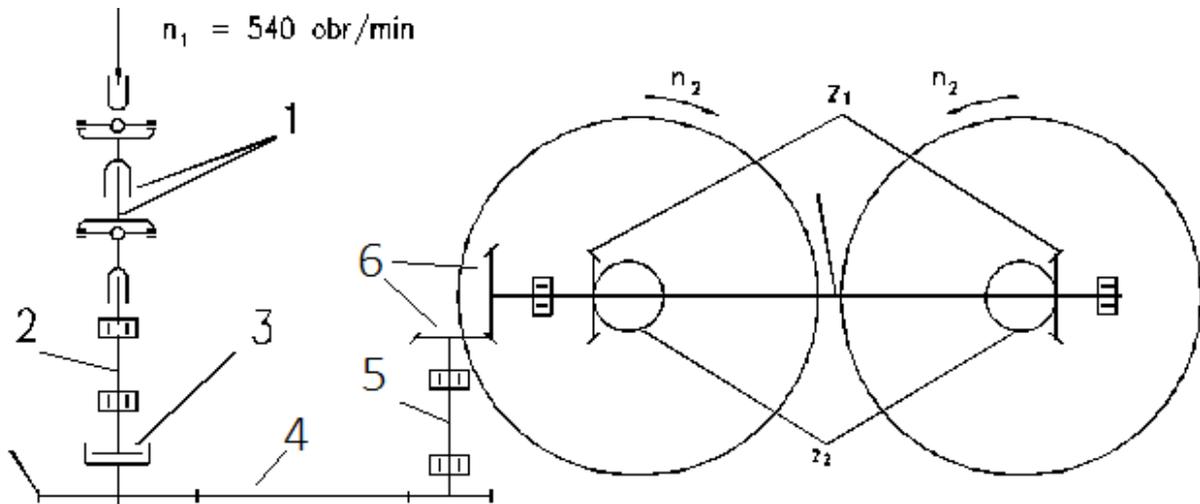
Drive system diagram: 1 – articulated telescopic shaft; 2 – drive head shaft; 3 – freewheel clutch (on large pulley); 4 – V-belt transmission; 5 – main frame shaft; 6 – bevel gear; n_1 – rotational speed of tractors PTO; n_2 – rotational speed of drums (values given in Table 2); z_1 – large bevel gear; z_2 – small bevel gear.
